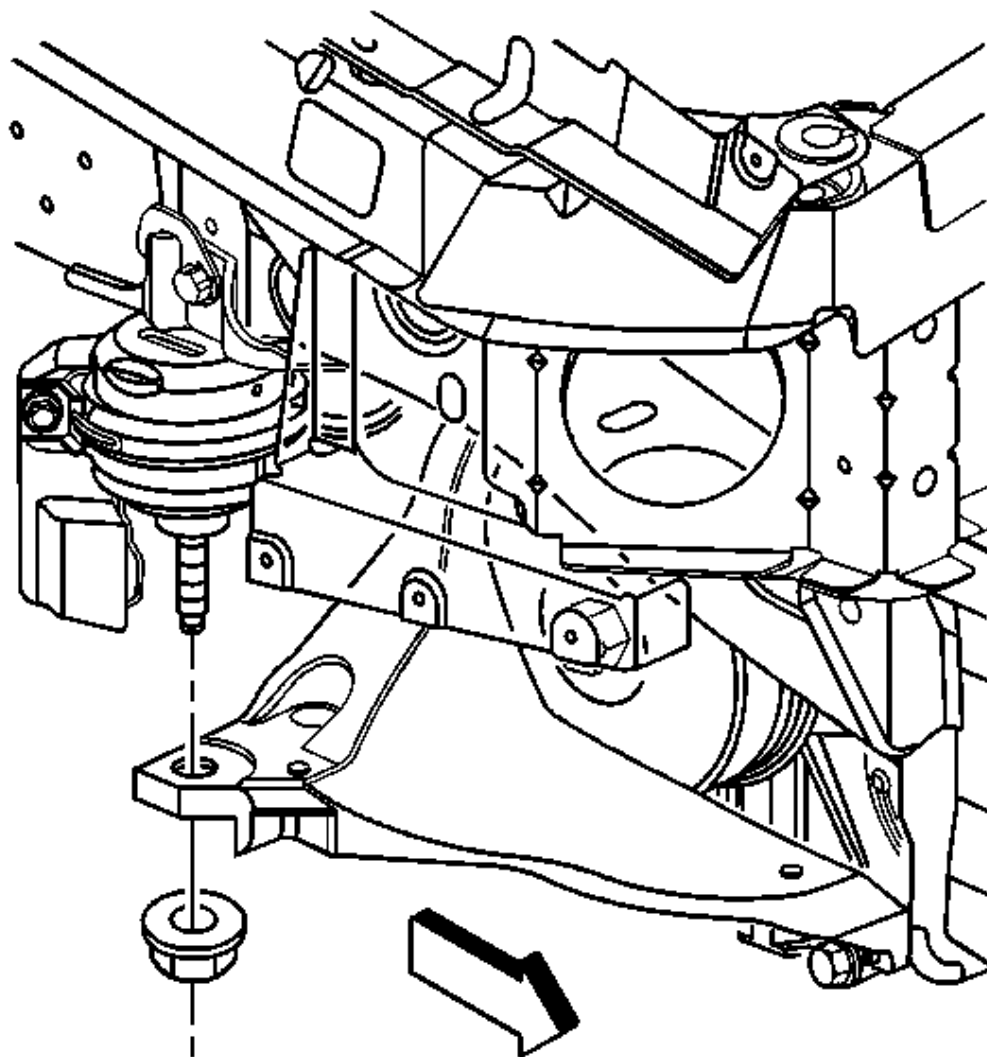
View of Nut Securing Right Engine Mount to Right Engine Mount Bracket
